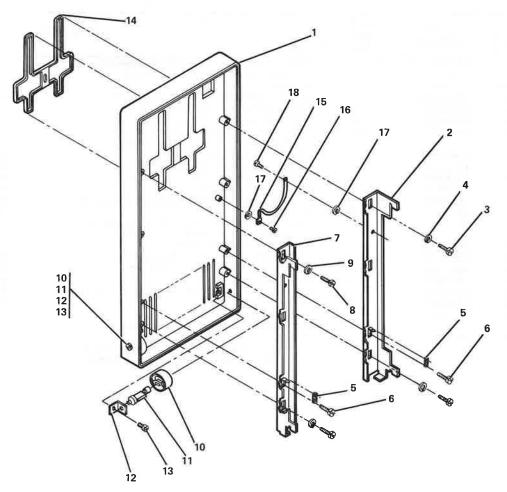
FRONT COVER ASSEMBLY. SEE LIST 4.
